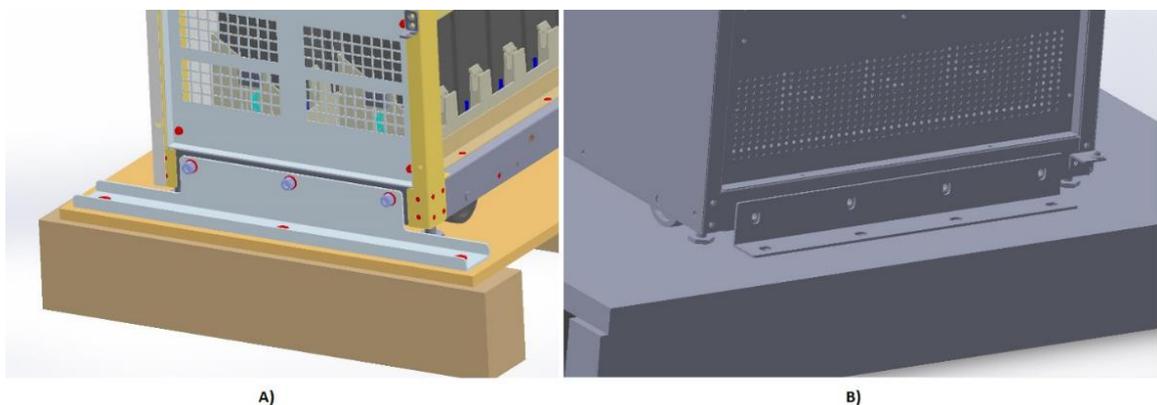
Mounting L-profiles; A) 93PS B) 93E.
